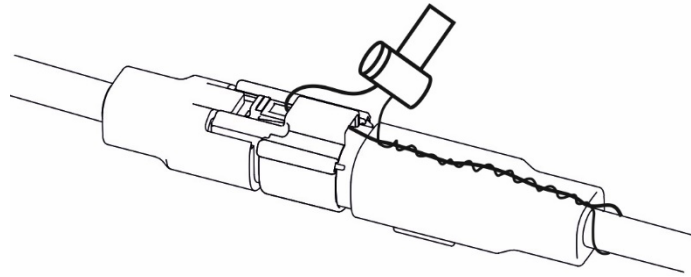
Sealing the sensor and mounting cable connection point with a rotary seal
